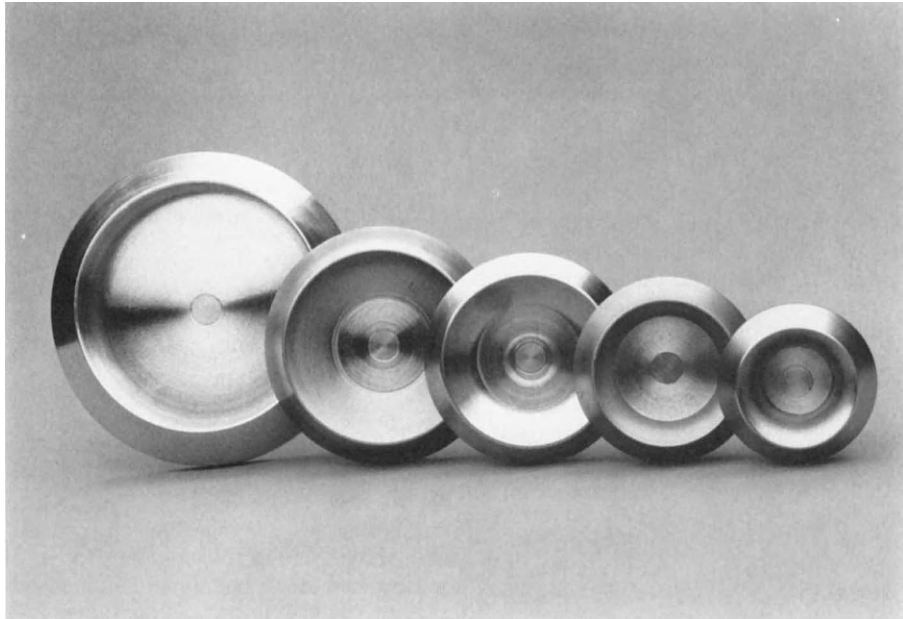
Interchangeable rotors for open-end spinning. With a discs-on-roller bearing system, the rotors can be exchanged easily. From left to right the rotor diameters shown are: 80, 65, 56, 48 and 40 mm. A 92 mm rotor (not shown) is also available. Courtesy of Schubert & Salzer A.G.
